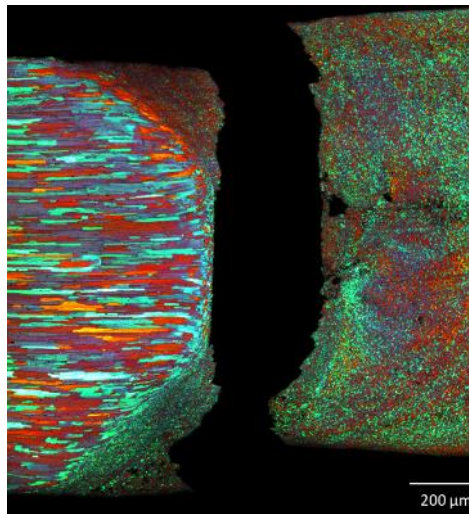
AA2060-SRBT-FSW HEW fracture surface macrograph on optical microscope showing volumetric defects near the fracture surface mode III, at AS SZ/TMAZ border.
